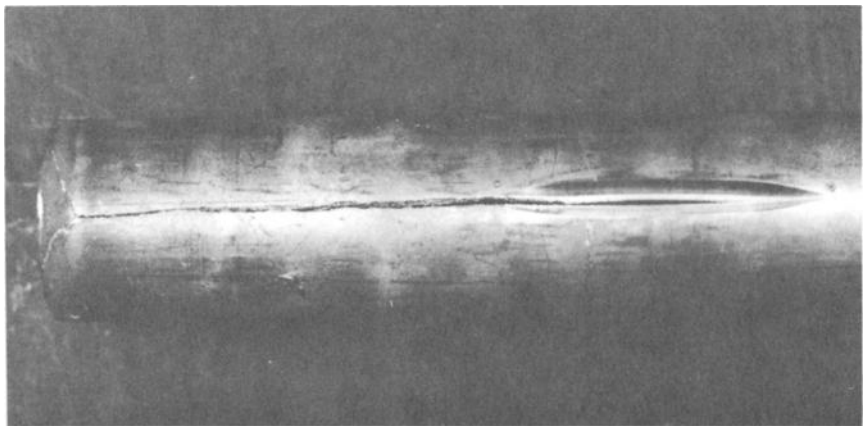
Base Metal Specimen Z-3, tested at -43°C , showing brittle fracture from the end of the notch to one end of the specimen. Note that the initial fracture in the notch was tough.
